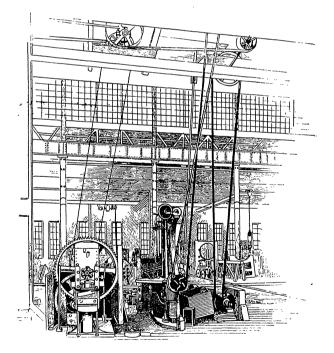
Electric Motor Driving Shear and Upright Drill.
